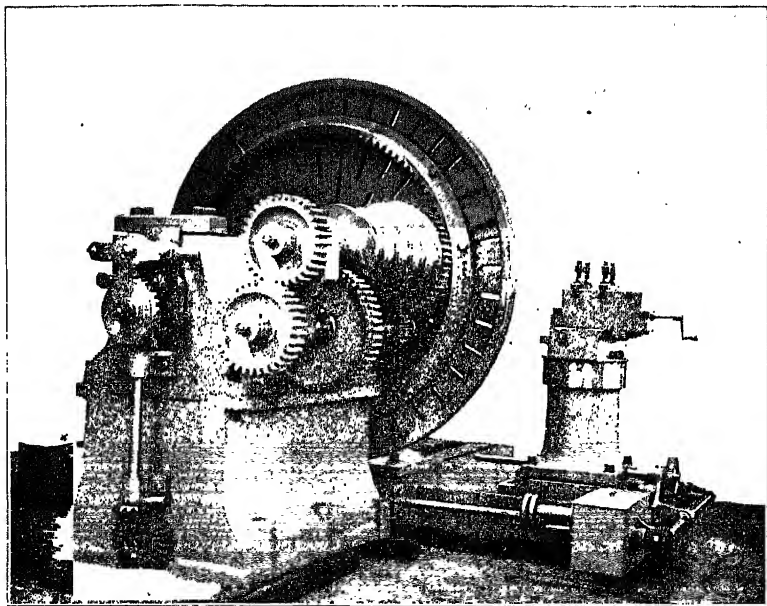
8-ft. Lathe for turning fly-wheels.
